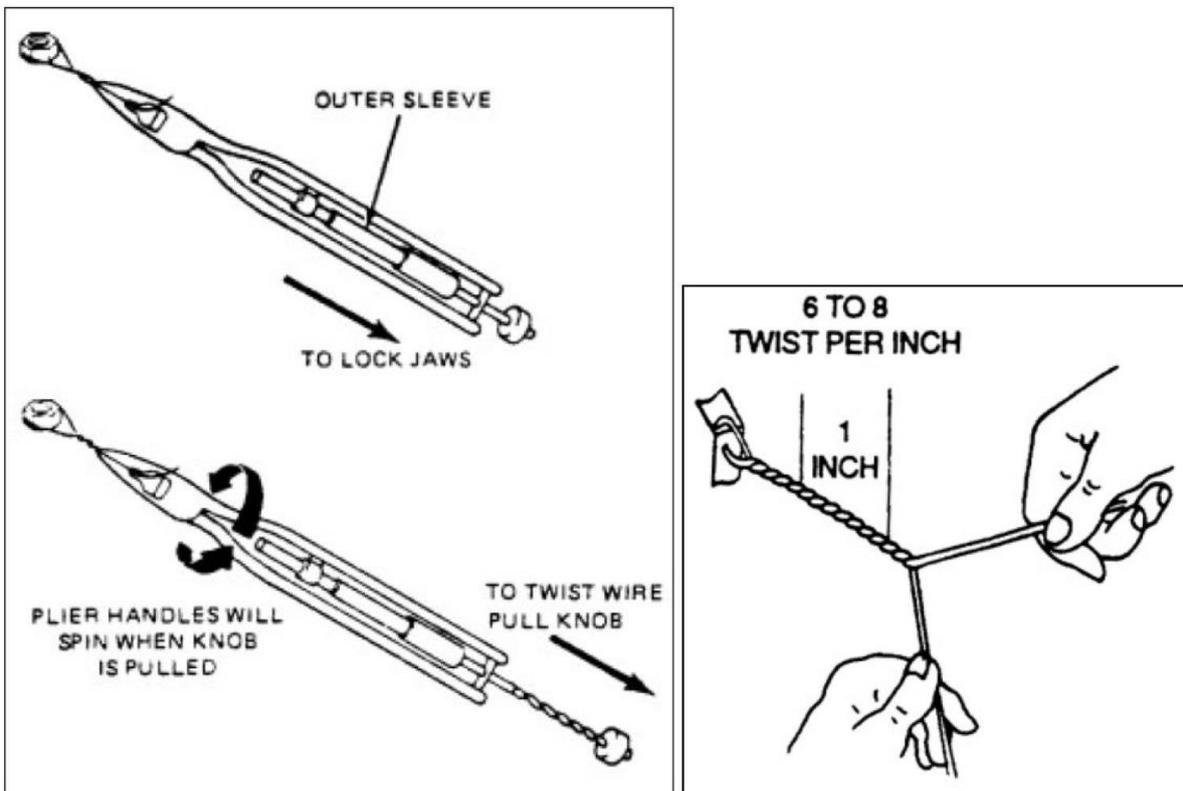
Safety Wire Installation Using a Twister/Pliers & By Hand
